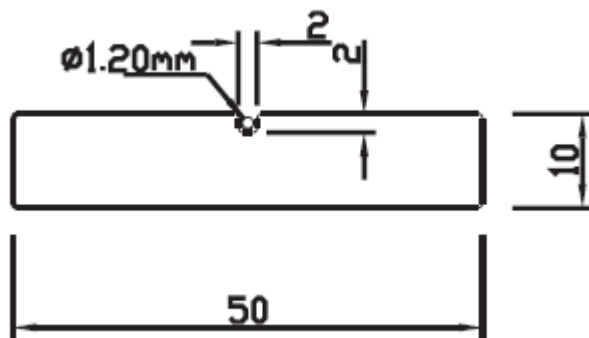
Cross section of scintillator extrusion. The nominal strip length is 6.4 m.
